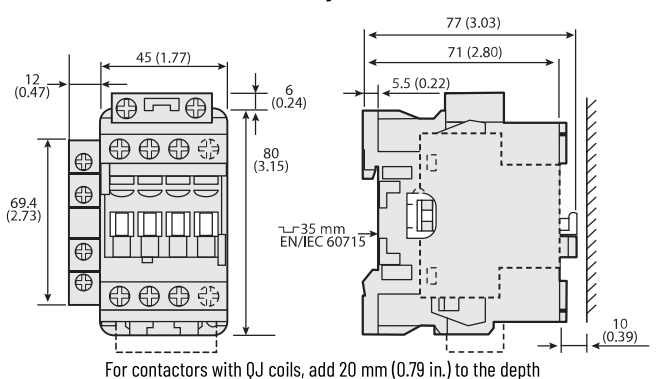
104-E09...104-E16 Reversing Contactors with Cat. No. 100-EMCA02 Mechanical and Electrical Interlock
